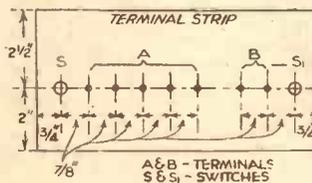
The drilling dimensions for the terminal mounting strip.
